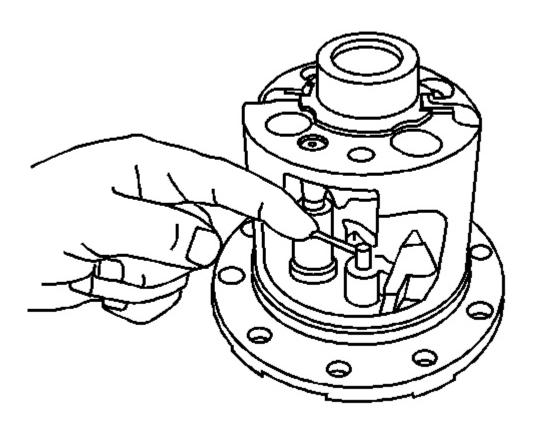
Installing Latching Bracket Busing Courtesy of GENERAL MOTORS CORP.
